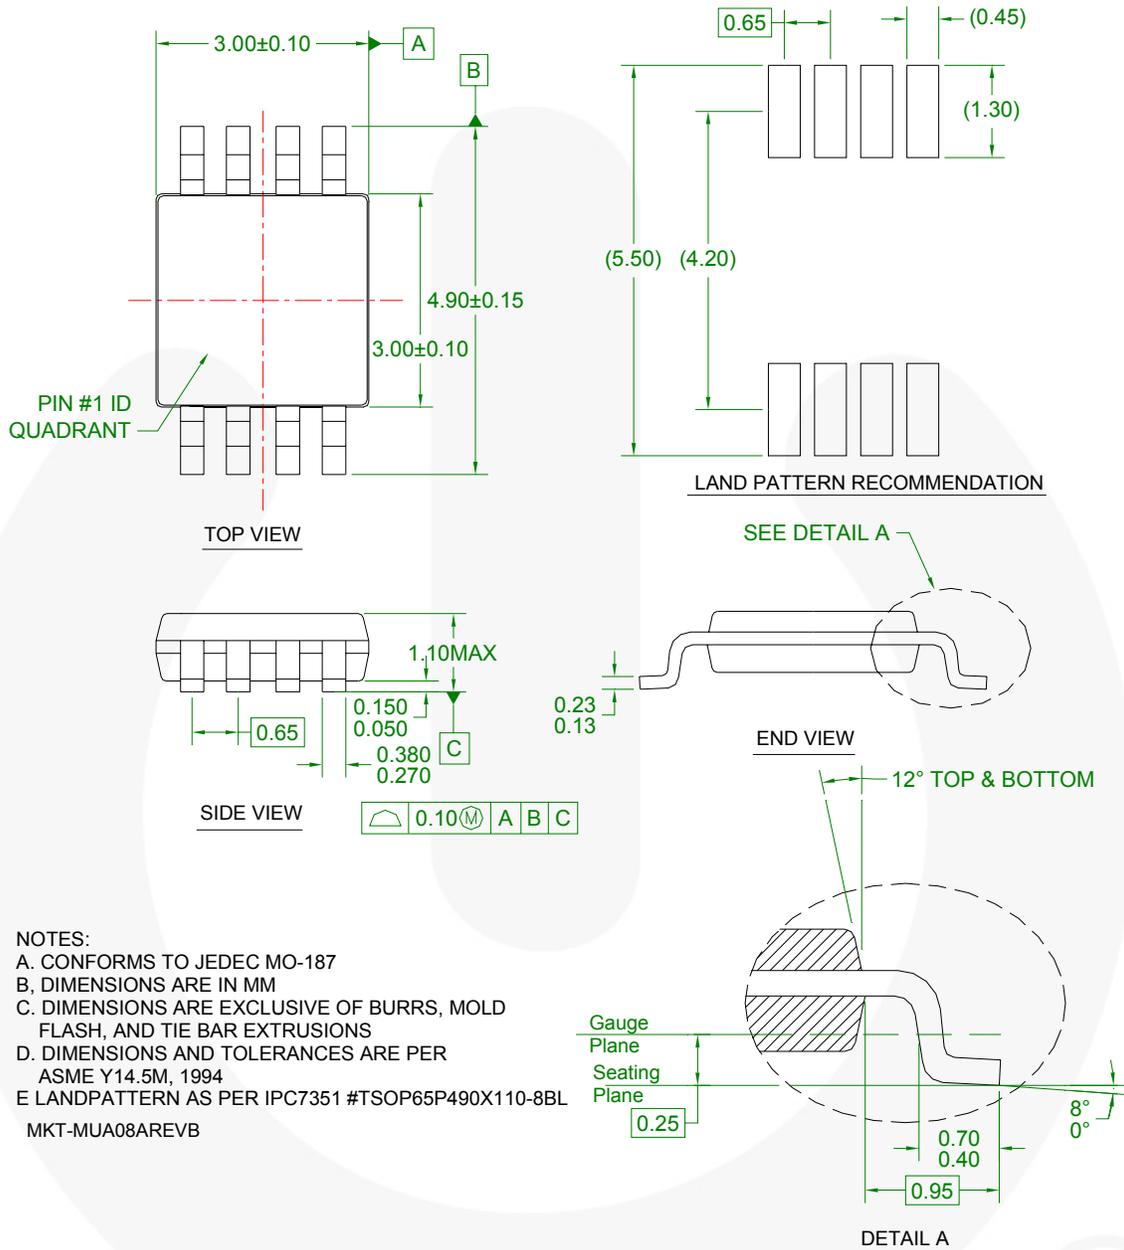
8-Lead Molded Small Outline (MSOP) Package
